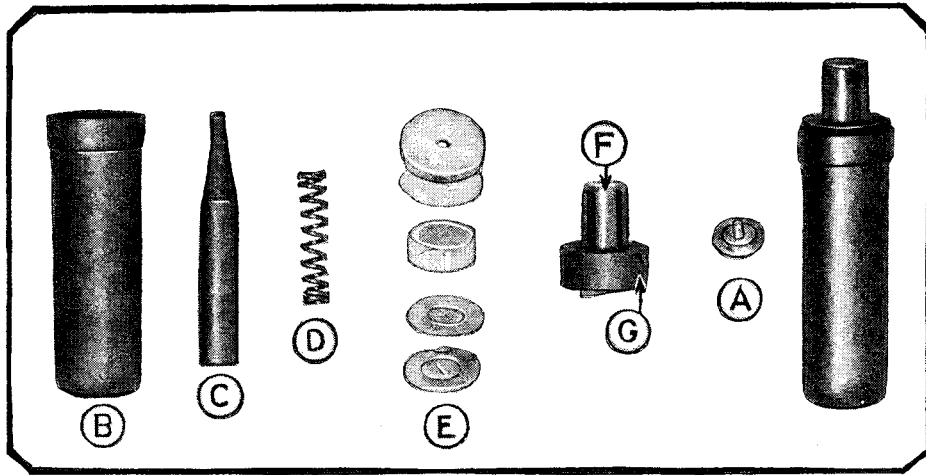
The component parts of the rectifier. B, steel container; C, alloy cathode; D, spring; E, washers; F, cathode terminal; G, bakelite bushing; A, anode contact. At the right is shown a completely assembled unit.
